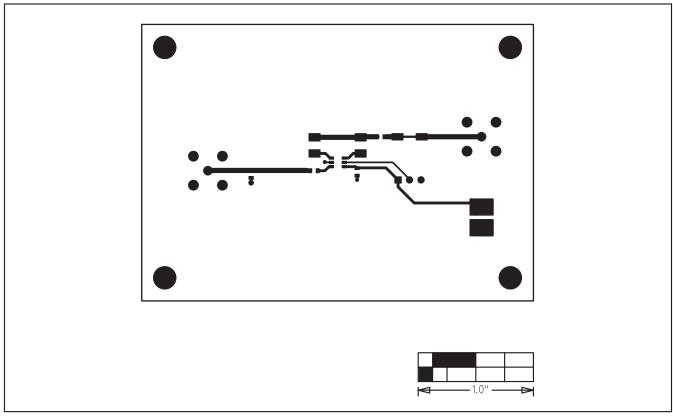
MAX4090 EV Kit PCB Layout—Component Side
